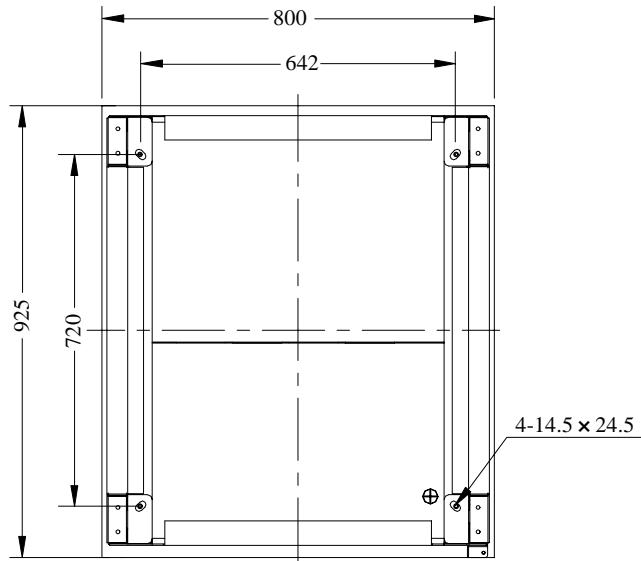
3 Installation hole dimensions for floor-mounted of battery cabinet (Unit: mm)
